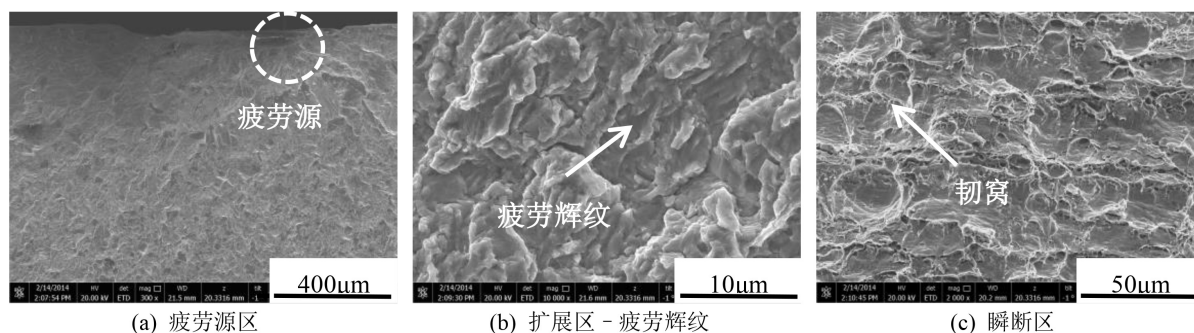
SEM morphology of the fatigue fracture surface of the polished joint fatigue specimen
